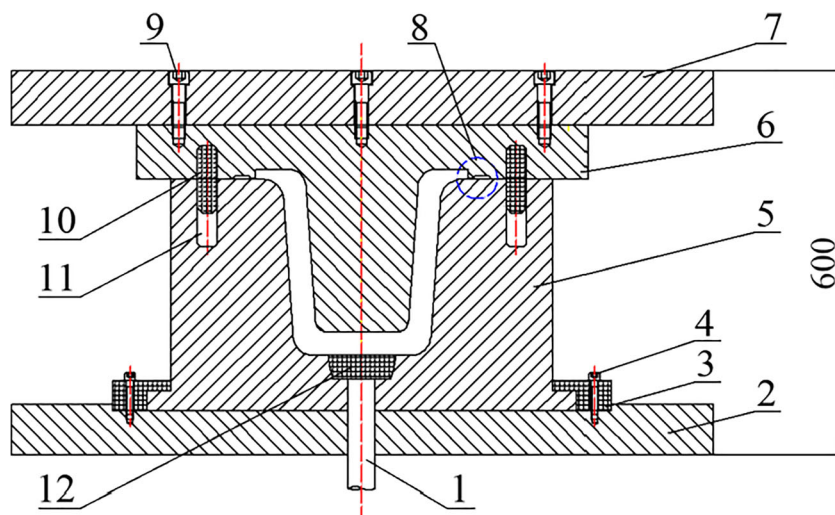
Schematic of the die structure of flanged cylindrical parts backward extrusion. (1) Ejector beam. (2) Lower platen. (3) Lower briquetting. (4) Bolt of lower briquetting. (5) Female die. (6) Male die. (7) Upper platen. (8) Flash gutter. (9) Connecting bolt. (10) Guide pin. (11) Guide hole. (12) Ejector tray
